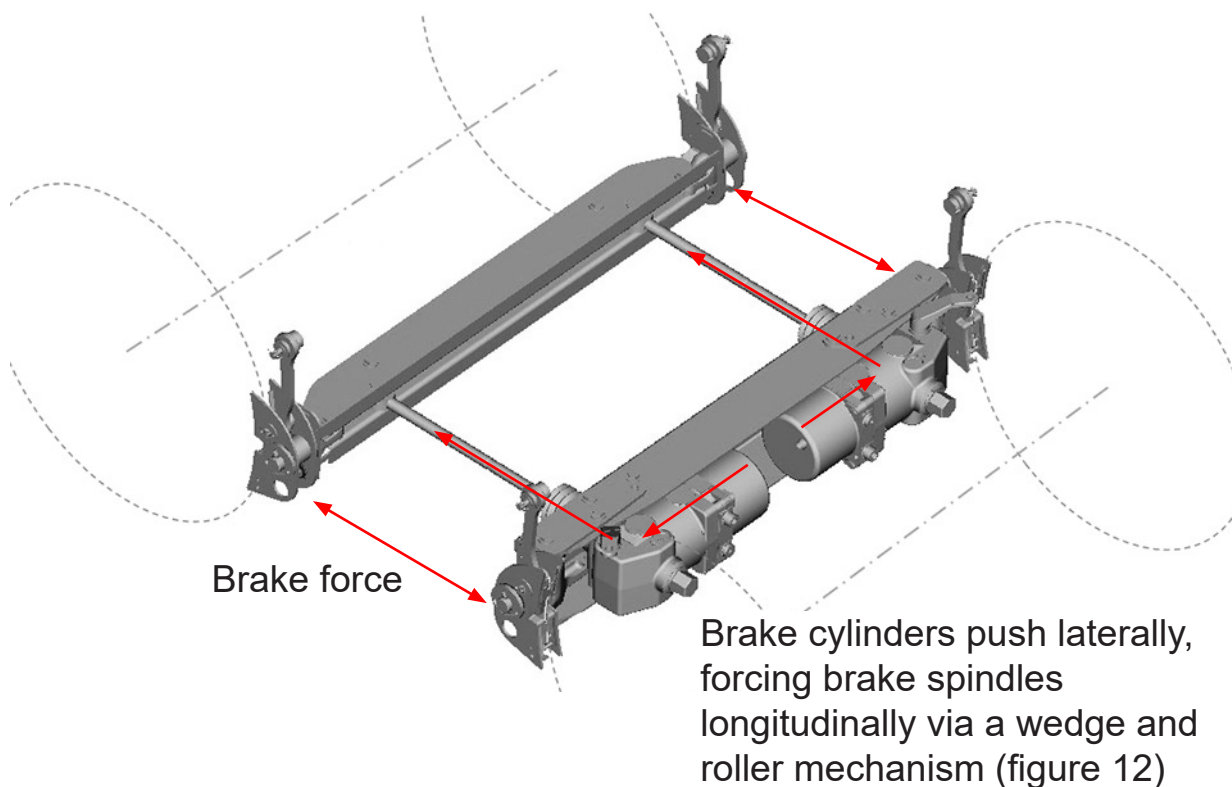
BFCB braking system for one bogie (brake blocks not shown).
